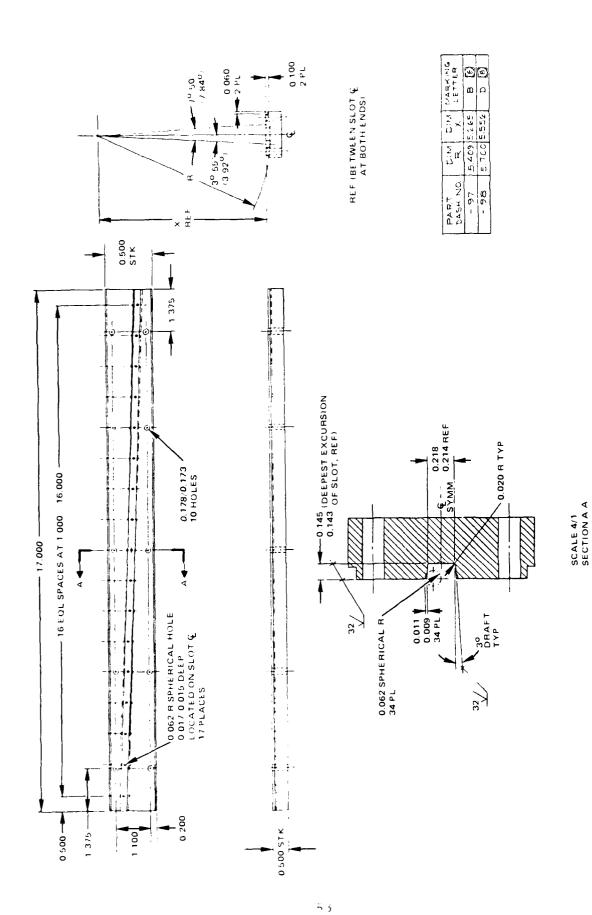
Skewed mold Dwg. No. 3707794 (Sheet 3 of 3).
